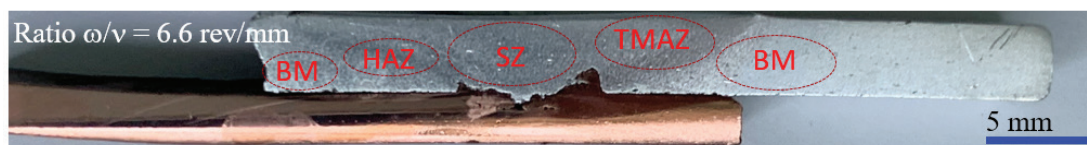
Formation of the weld zone between AA6061 and C1100.
